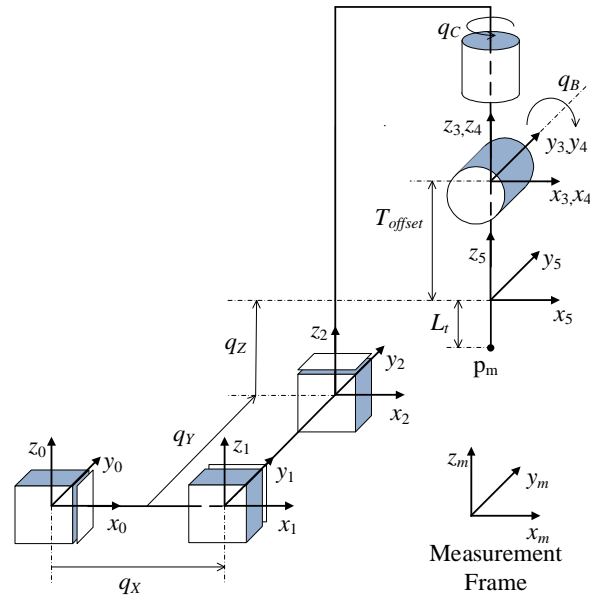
Industrial 5-axis machine tool kinematic diagram.
